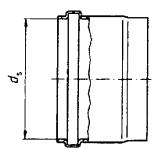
PUSH-FIT SOCKET FOR FUSION OF PIPE ENDS
